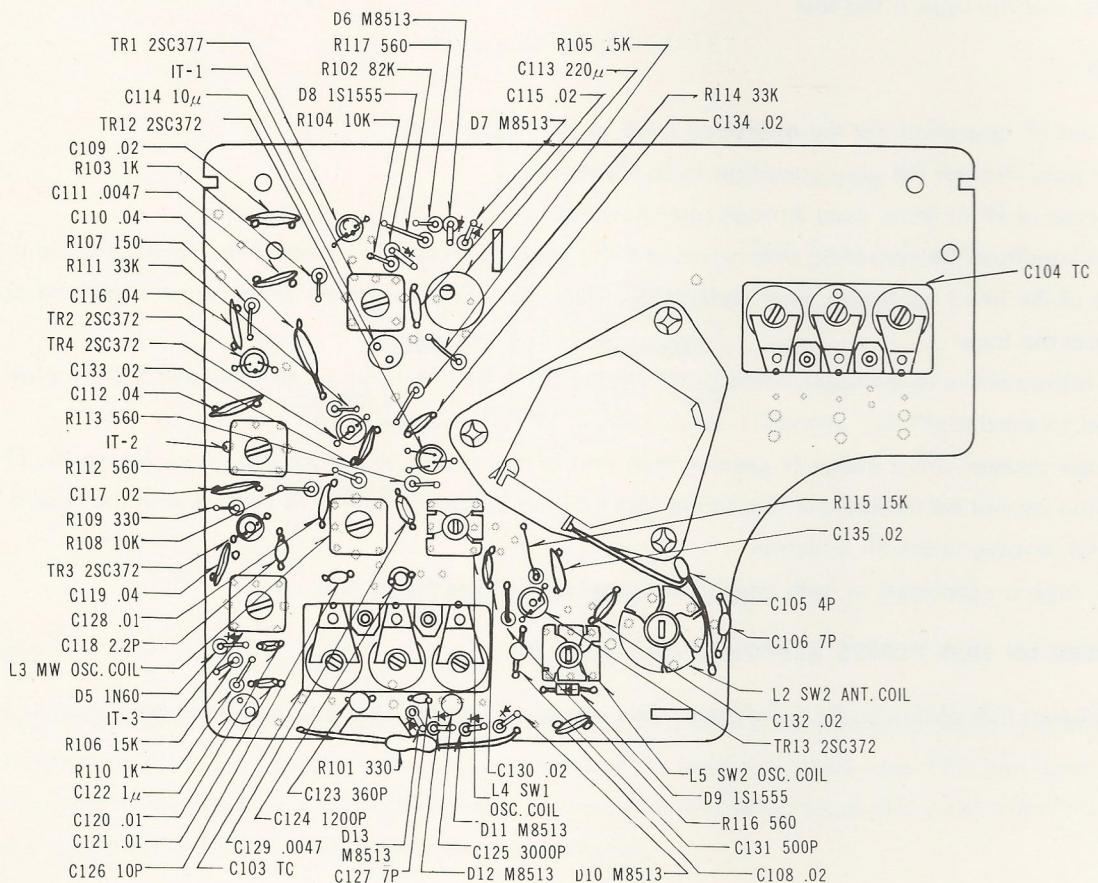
TOP VIEW OF CHASSIS TUNER SECTION
